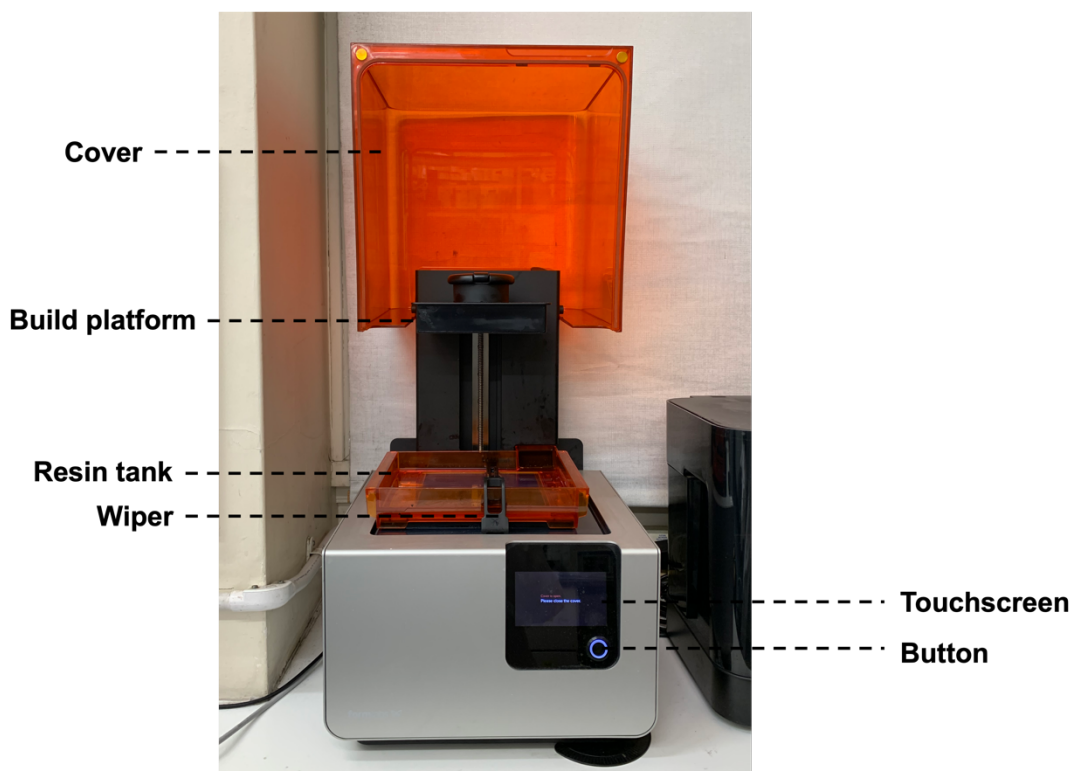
Picture of a Form 2 SLA 3D printer with the cover lifted.
